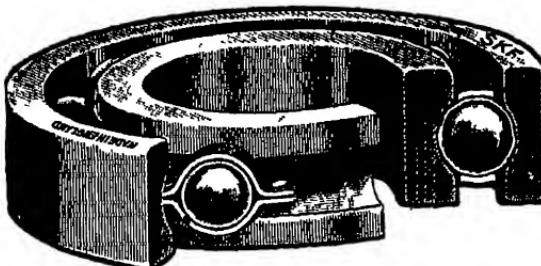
THE SKF DEEP GROOVE BALL BEARING, SHOWING THE BALL CAGE
